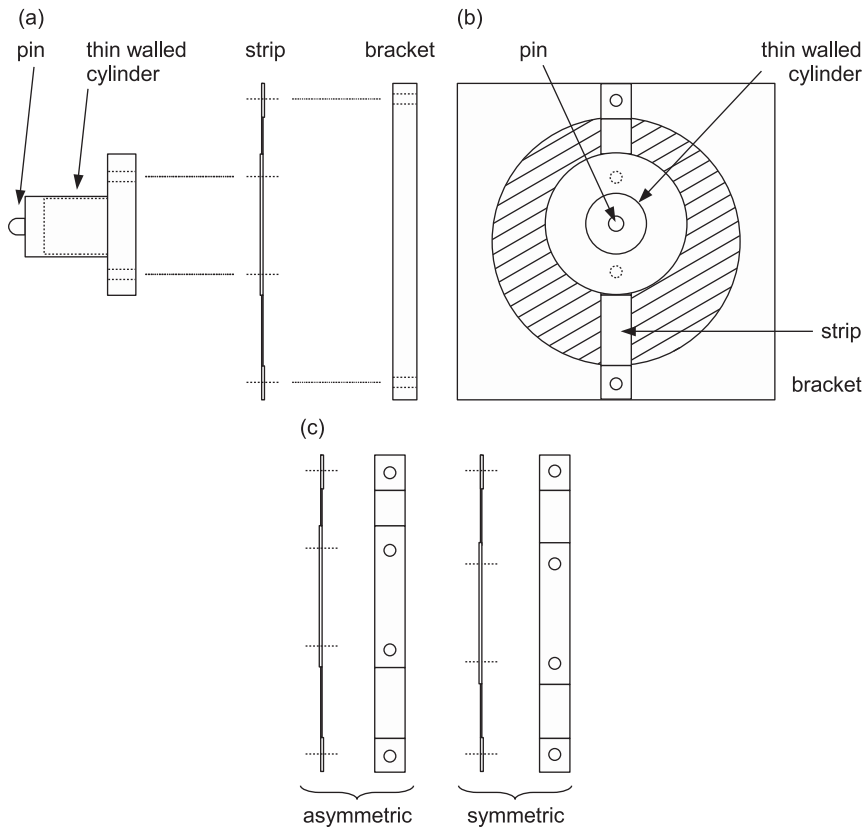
The pin assembly. (a) Pin assembly: from side. (b) Pin assembly: from disc. (c) Asymmetric and symmetric metal strips.
